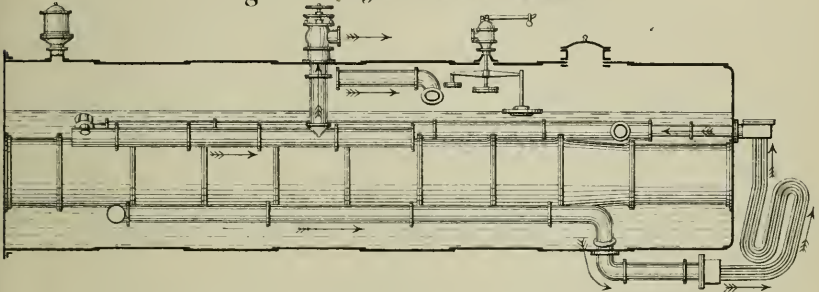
Sectional Plan, under flues.* Scale $\frac{1}{96}^{th}$
